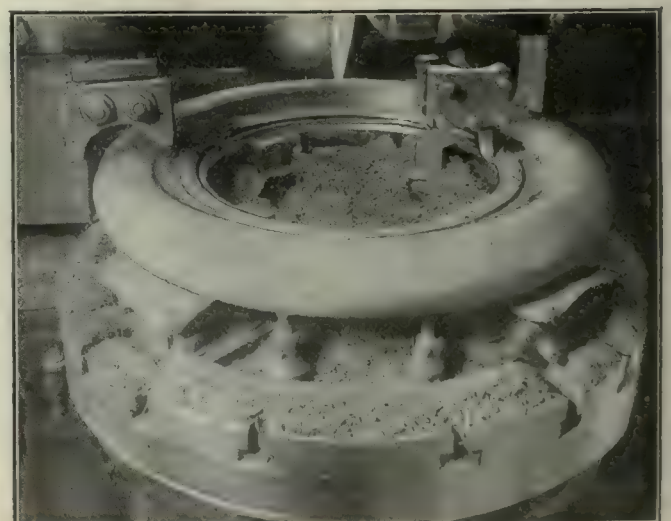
BORING MILL EQUIPPED FOR FINISHING CORES
